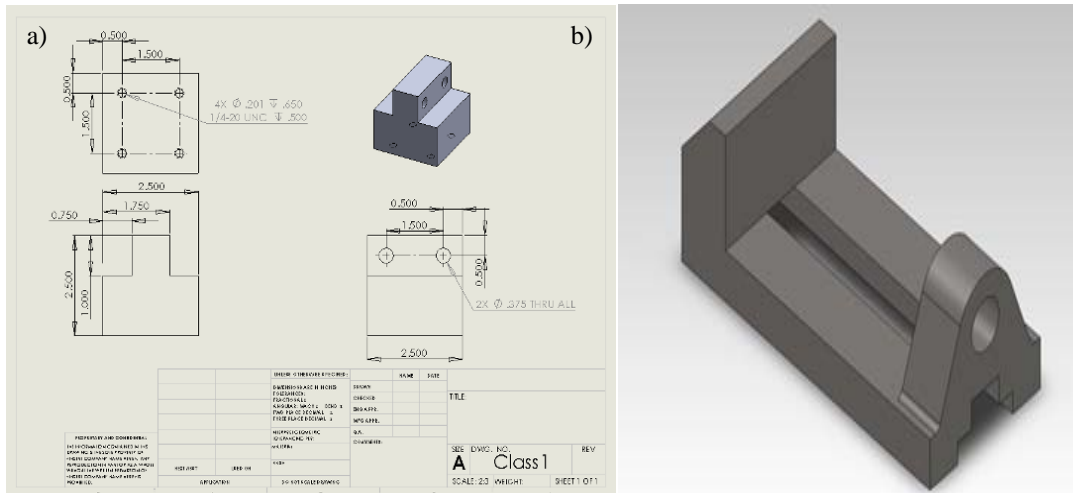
Module One a) in-class assignment drawing and b) homework drawing.
